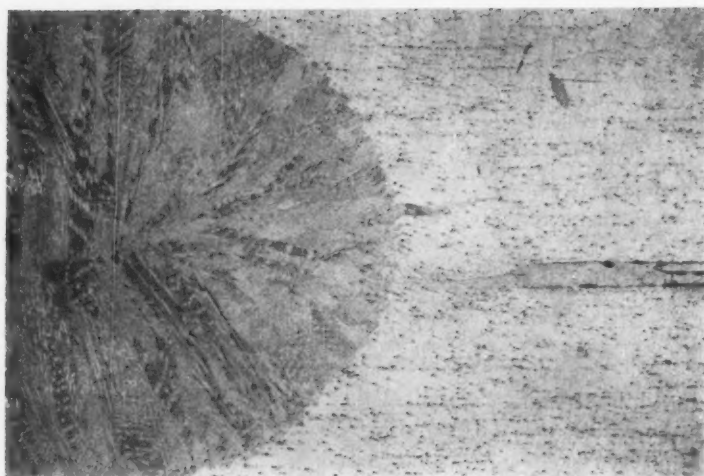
Macrograph Shows That Hot Molten Weld Metal Was Squeezed Out of the Nugget. This defect occurs if welding current is too high. Etchant: 92% HCl, 5% H_2SO_4 , 3% HNO_3 ; 50 \times
